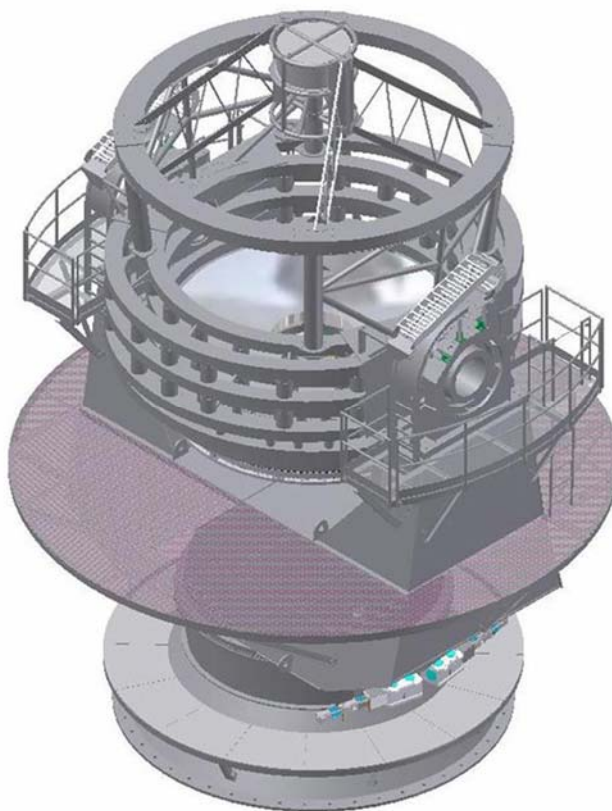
Design of VISTA telescope structure at Final Design Review. The large flat section is level with the dome floor. Camera at Cassegrain and secondary mirror are not shown.
